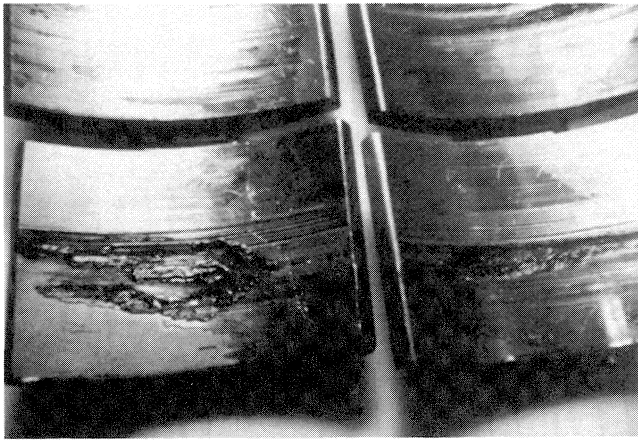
Radial Bearing Damage, Ashland Oil Company.
